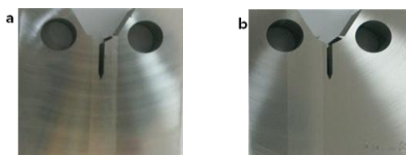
The schematic of (a) the weld and (b) HAZ specimens.
